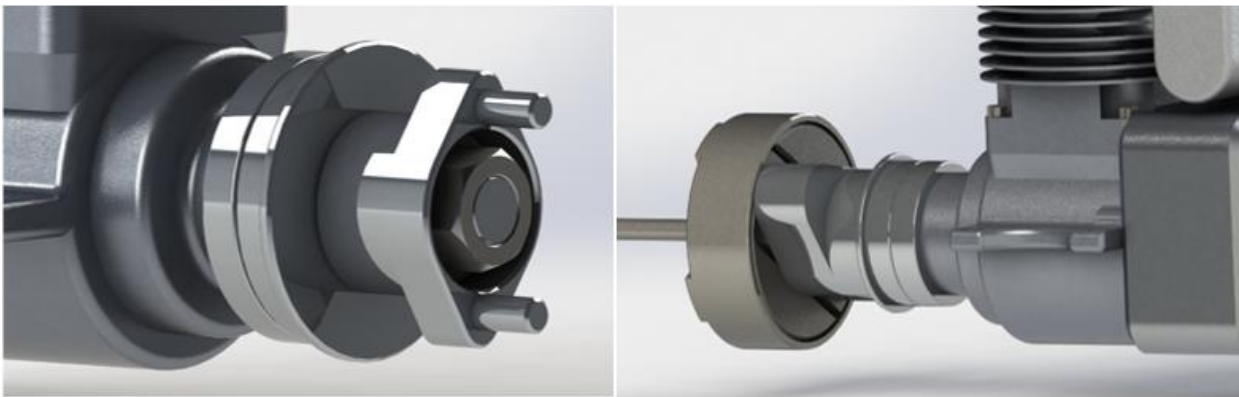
Left-clutch receiver/mount. Right-complete clutch assembly mounted to the engine
